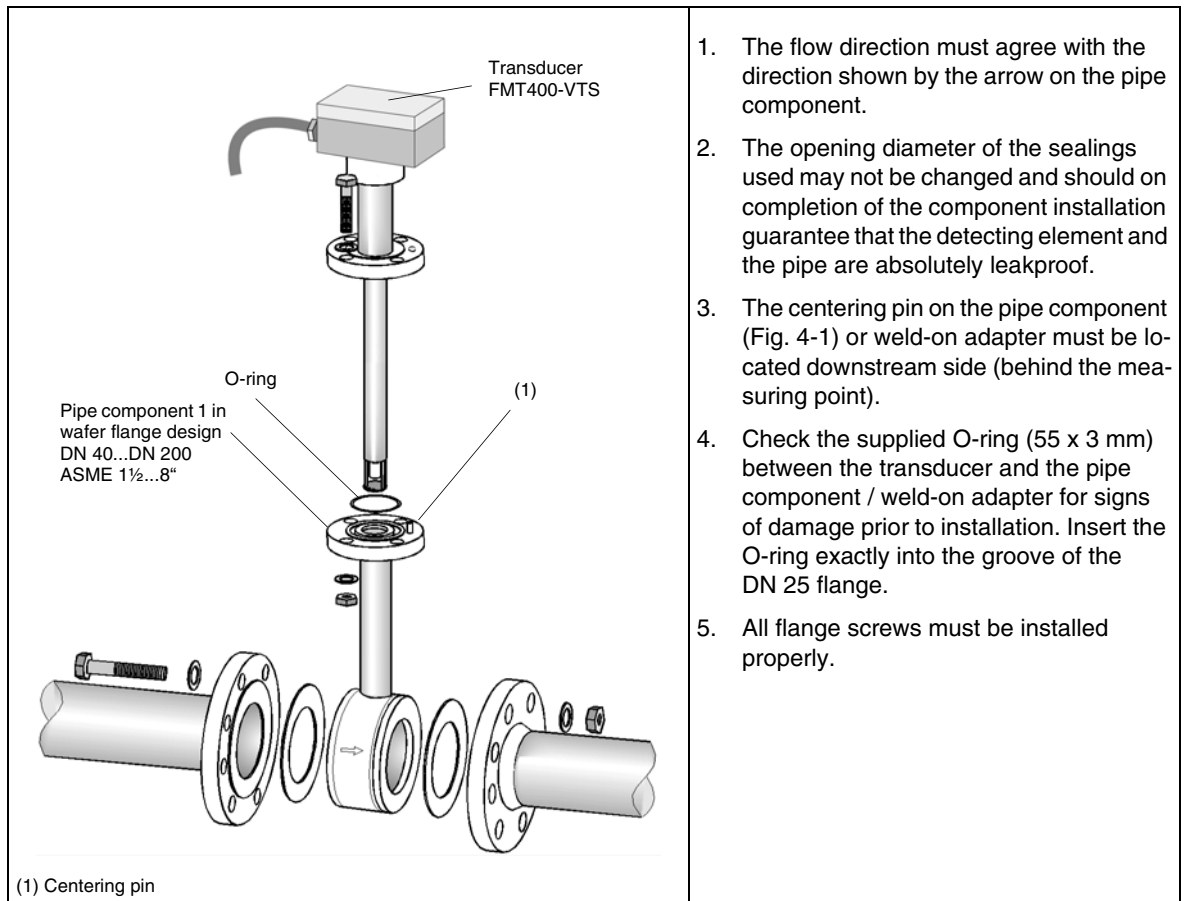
Schematic illustration of a pipe component 1 with intermediate flange
